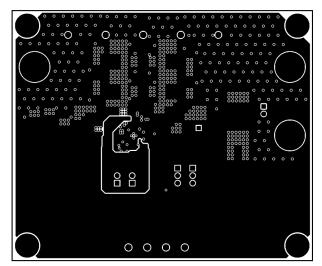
LM74912Q1EVM Board Bottom Layer
